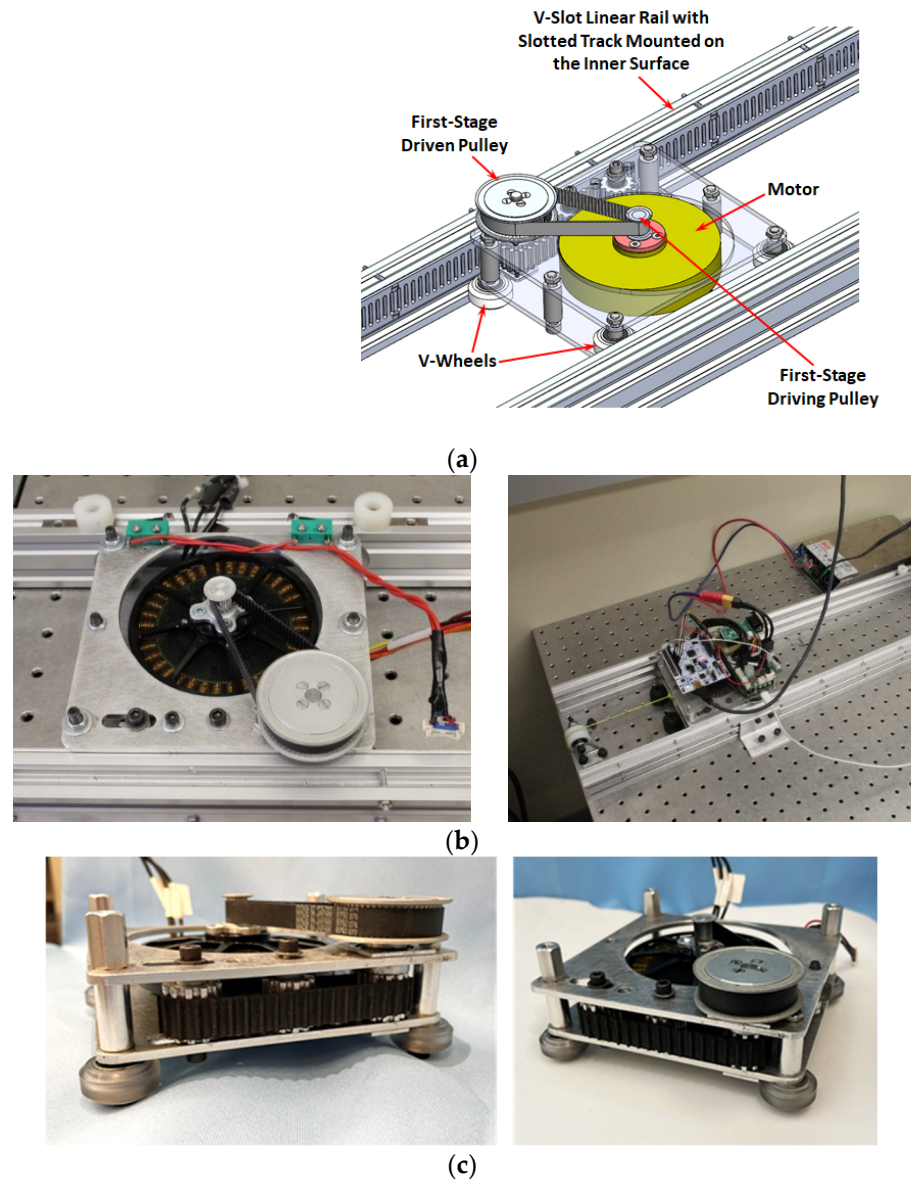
The B-SALD prototype: (a) CAD model and the major components; (b) photos of the assembled device; (c) photos of the driving mechanism of the moving platform.
